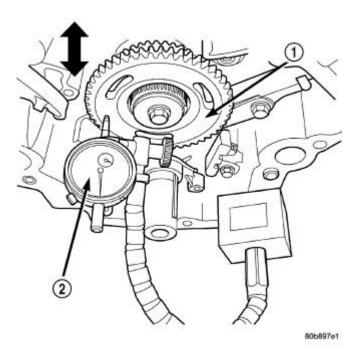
Camshaft Sprocket Installation-Right Cylinder Head Courtesy of CHRYSLER LLC
